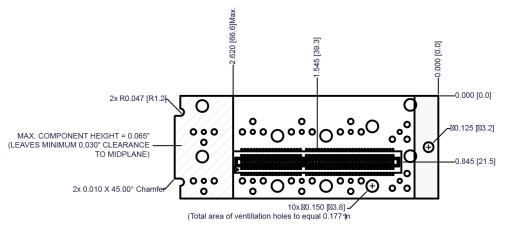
DFR-8321 Full Rear Module — Solder Side
